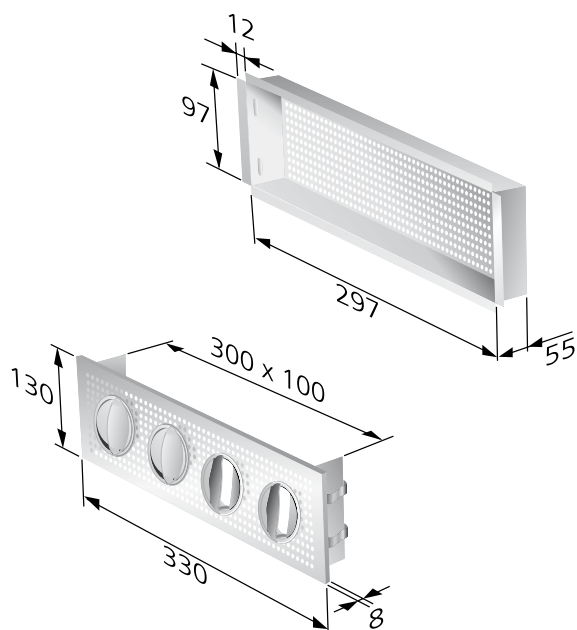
DRG with mounting frame. Hole making size = 300 x 100 mm. Weight: 1.1 kg
